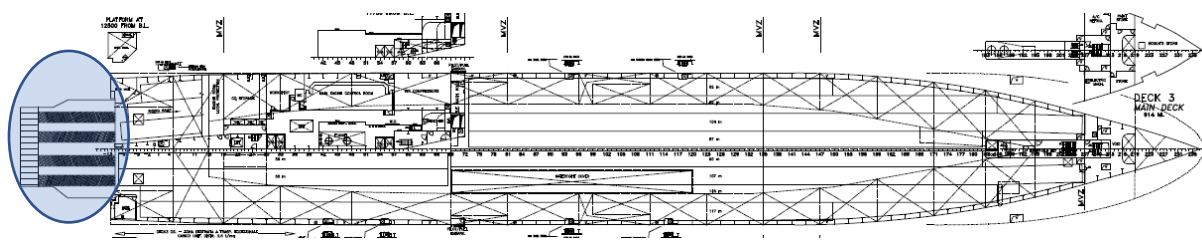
Location of Ro-Ro space loading ramp on deck 3.
